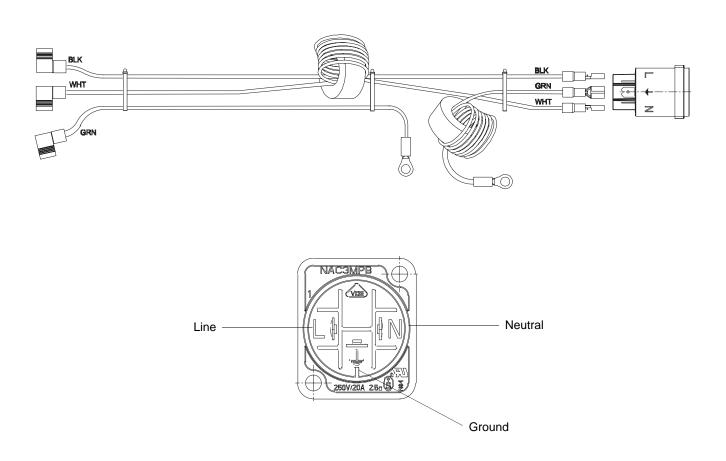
VLX3 Wash AC Input Cable Assembly
